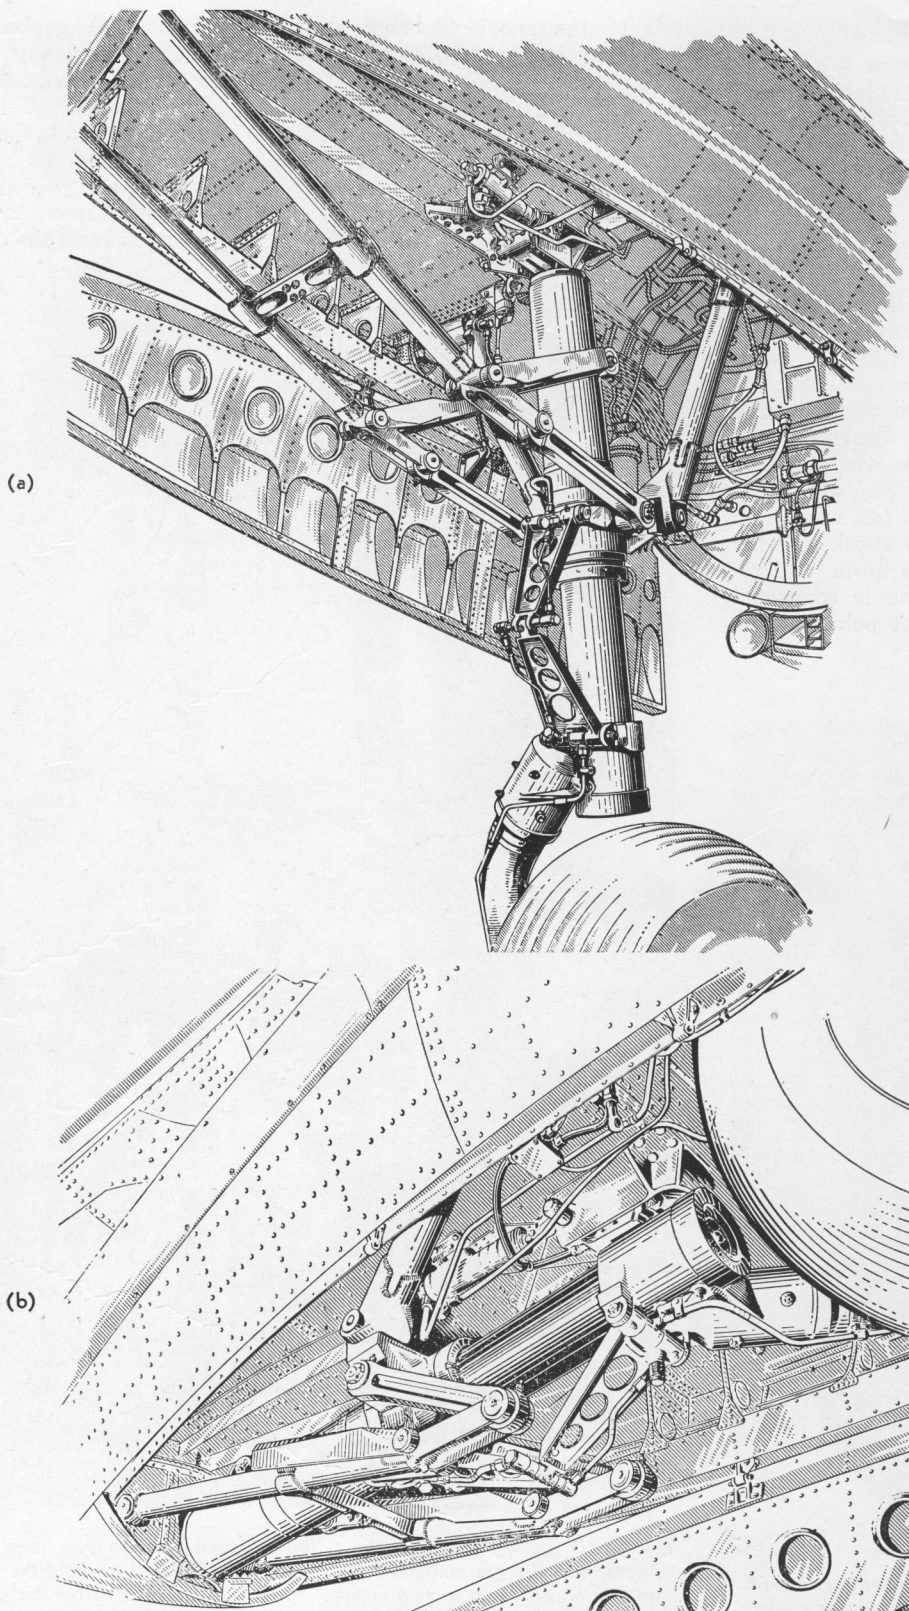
Main landing gear in extended position (a) showing the side brace struts, H-frame fore-and-aft bracing, and latching lock atop the air-oil shock absorbing unit. During retraction, the top of the shock strut moves aft while the wheel moves up and forward to position, as shown in the three-quarter front view (b).
